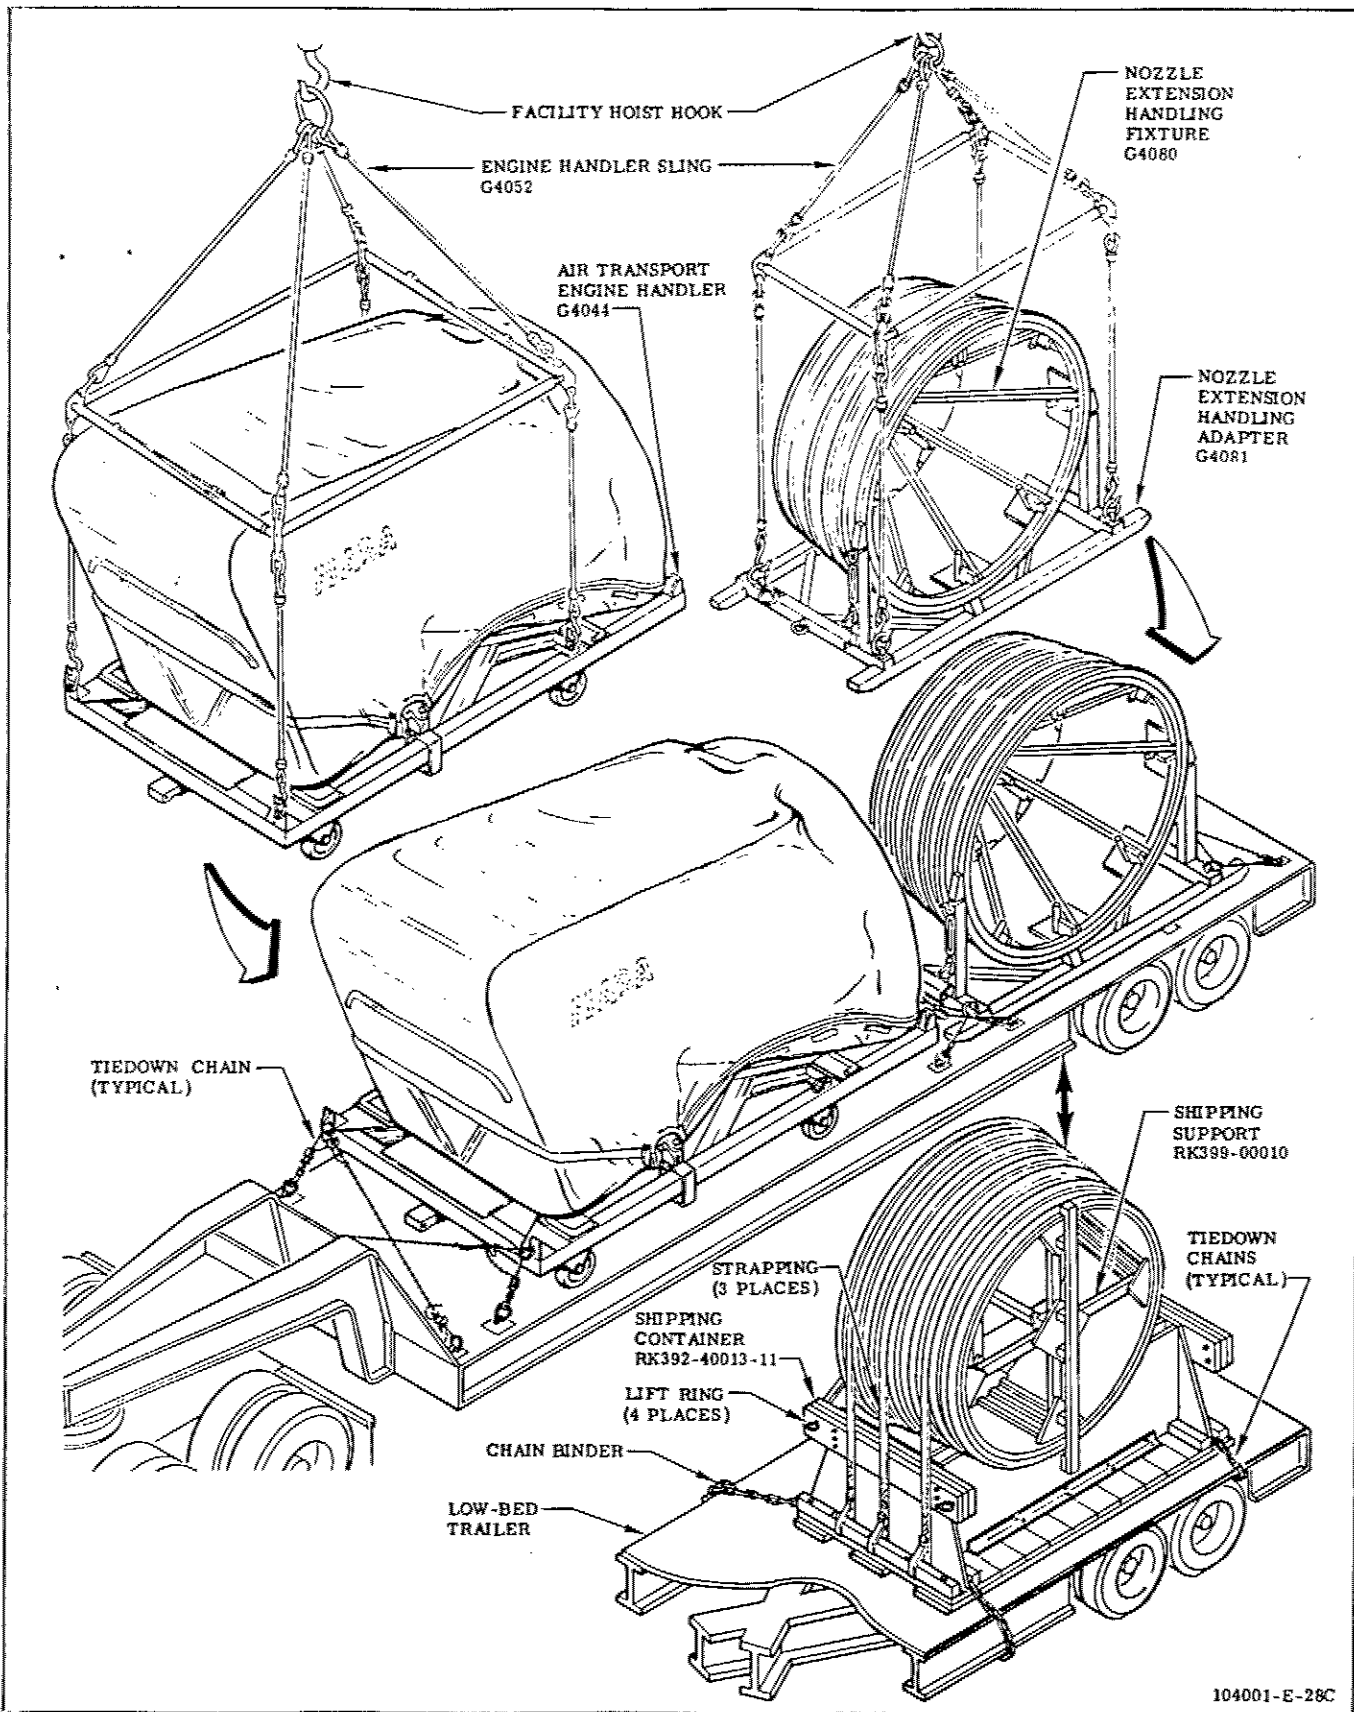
Loading Engine and Nozzle Extension on Low-Bed Trailer
